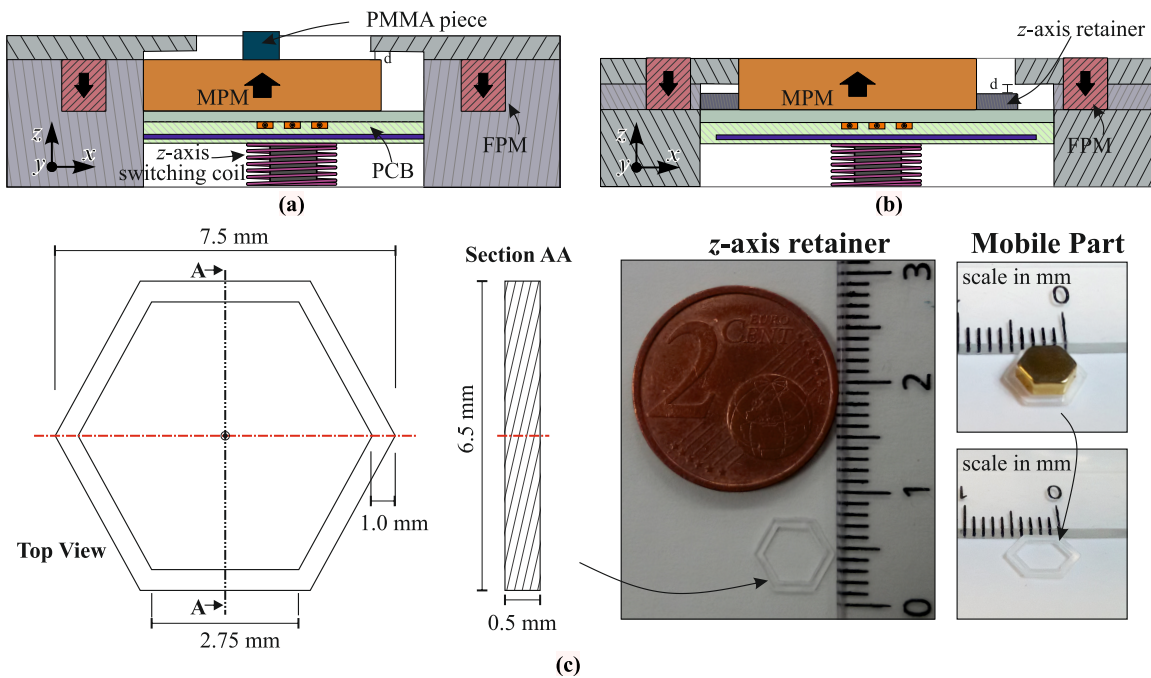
(a) Configuration 1: Mobile part with a PMMA piece. (b) Configuration 2 : Mobile part with a z -axis retainer. (c) Geometrical design, fabricated z -axis retainer and mobile part assembly.
